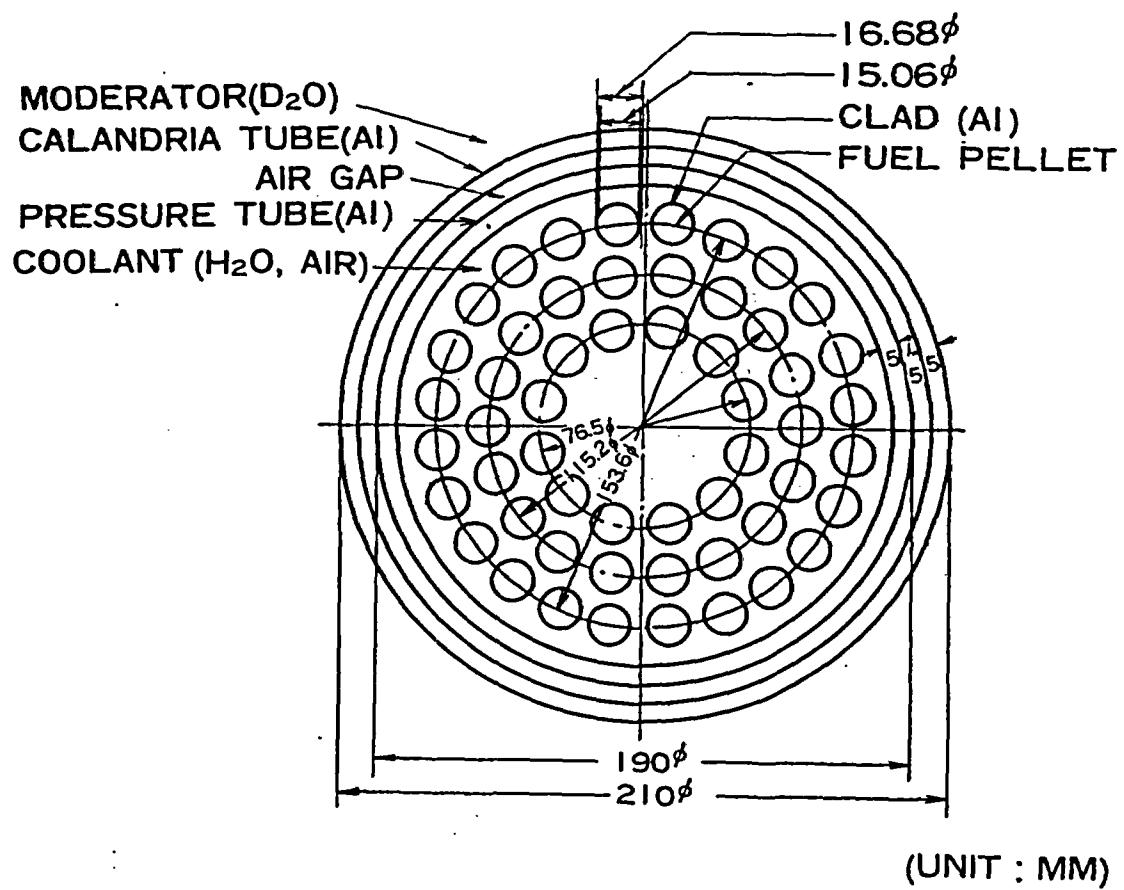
Cross Sectional View of 54-pin Test Fuel Cluster
